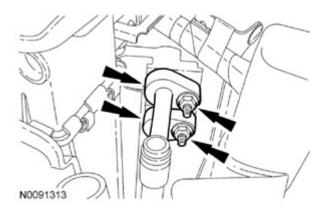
Locating A/C Condenser Core And Nuts Courtesy of FORD MOTOR CO.
